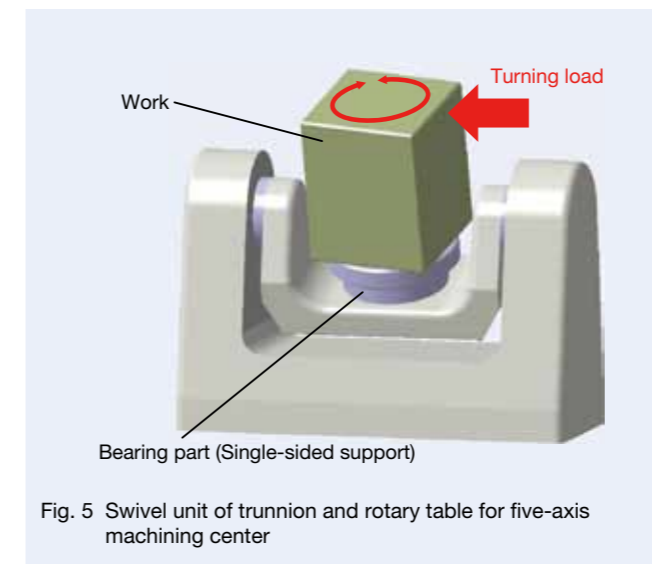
Swivel unit of trunnion and rotary table for five-axis machining center
